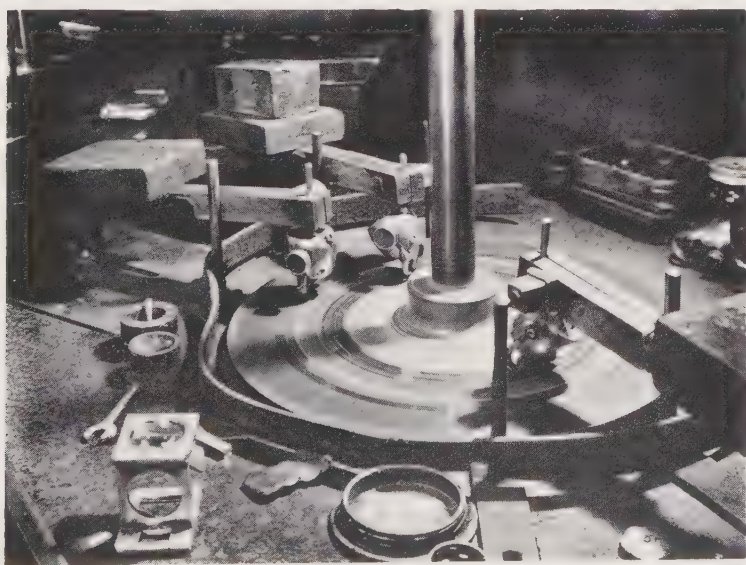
Mechanical claw-type dops holding diamonds on a scaife or lap. The dops are mounted in the end of tangs, which are weighted to achieve the necessary polishing pressure. (De Beers)
